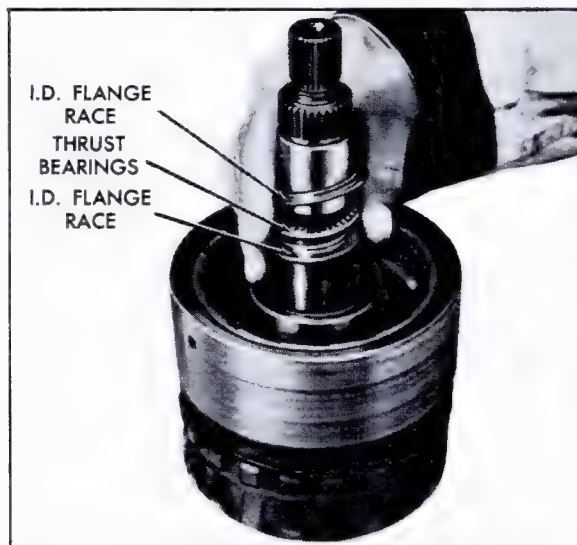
Installing Center Support Races and Thrust Bearing at Sun Gear
